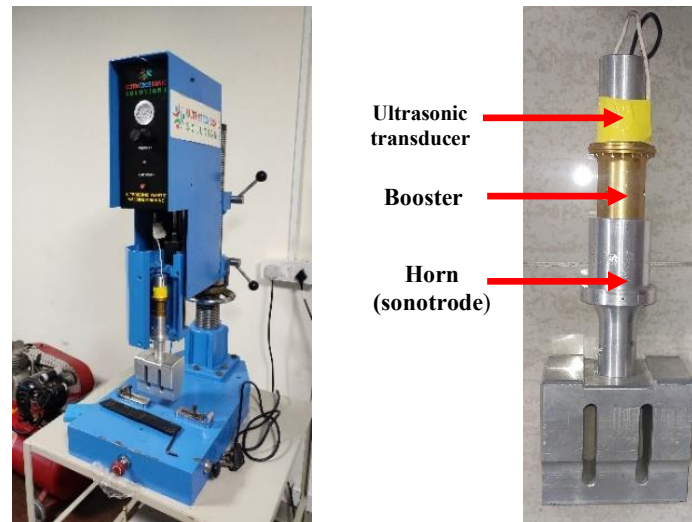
Images of Ultrasonic weld machine, transducer, sonotrode (booster), horn assembly
